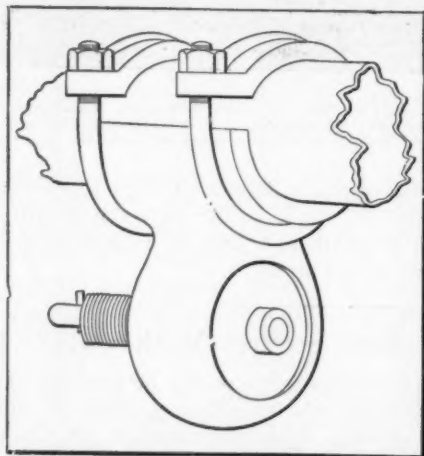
S. B. R. Muffler Cut-out, showing the attachment to an exhaust pipe.
